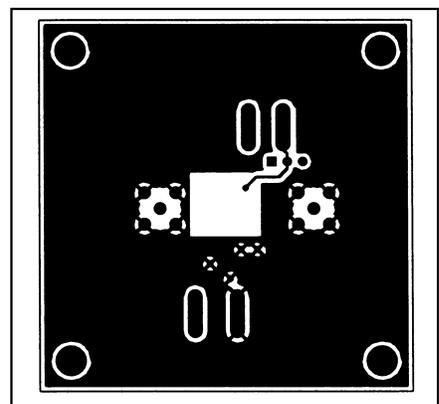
SO-8 High-Speed EV Board Layout—Solder Side
